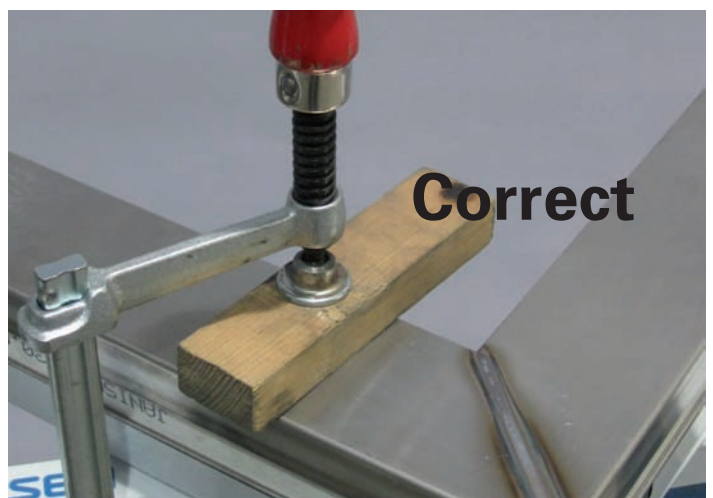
Use wooden or plastic supports to clamp the frame in place
